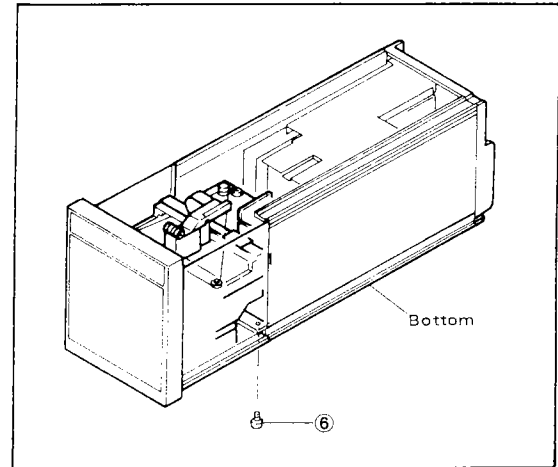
Removing Two Screws from the Recorder Bottom.
